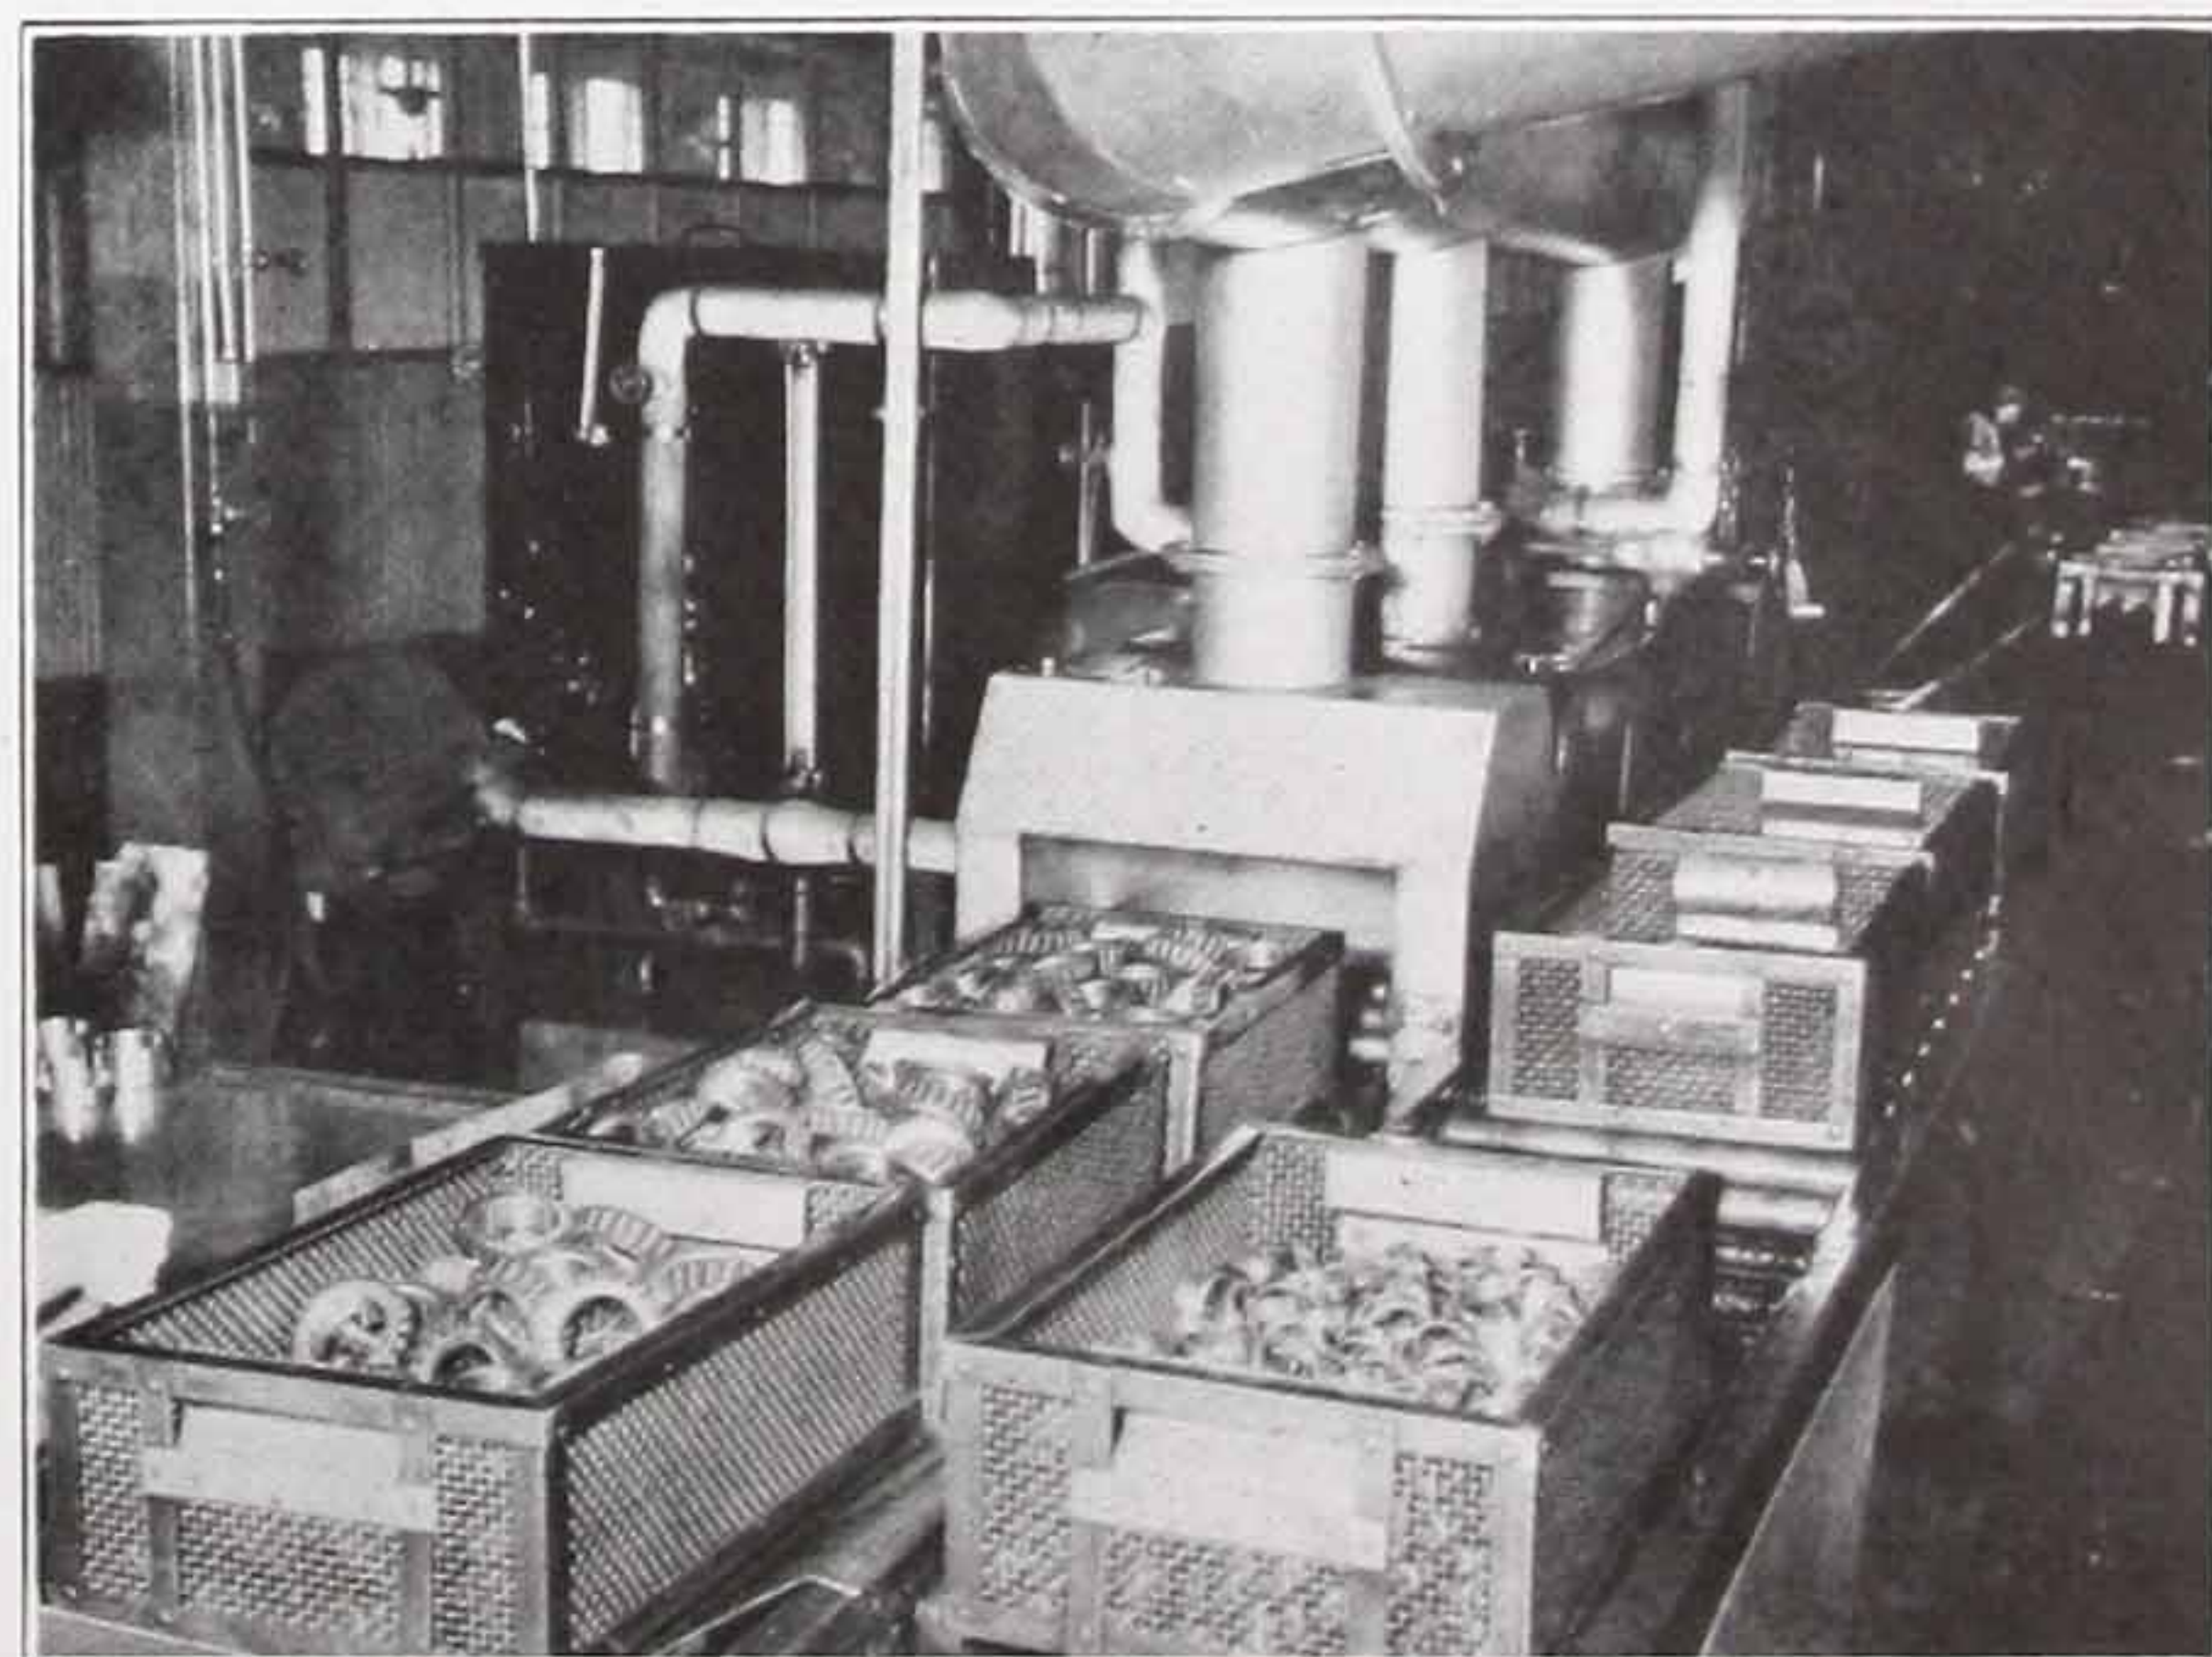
Molten rust preventive is sprayed on these roller bearings as they pass through this continuous oven conveyor, after which they are wrapped in oiled paper.
